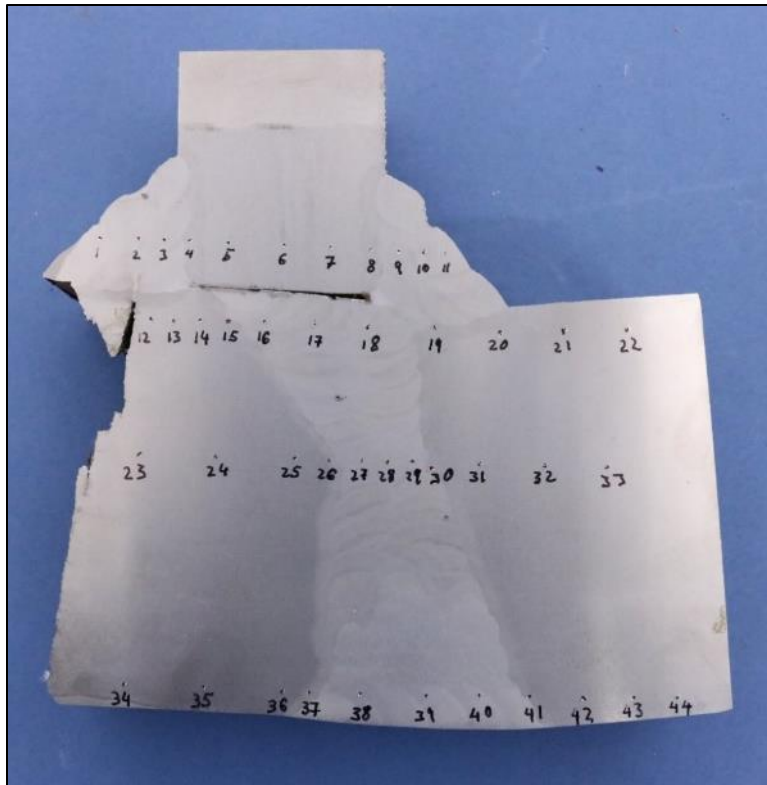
Cross-section specimen from girder sample D.4-S showing the etched weld profiles and Rockwell B hardness measurement locations.
